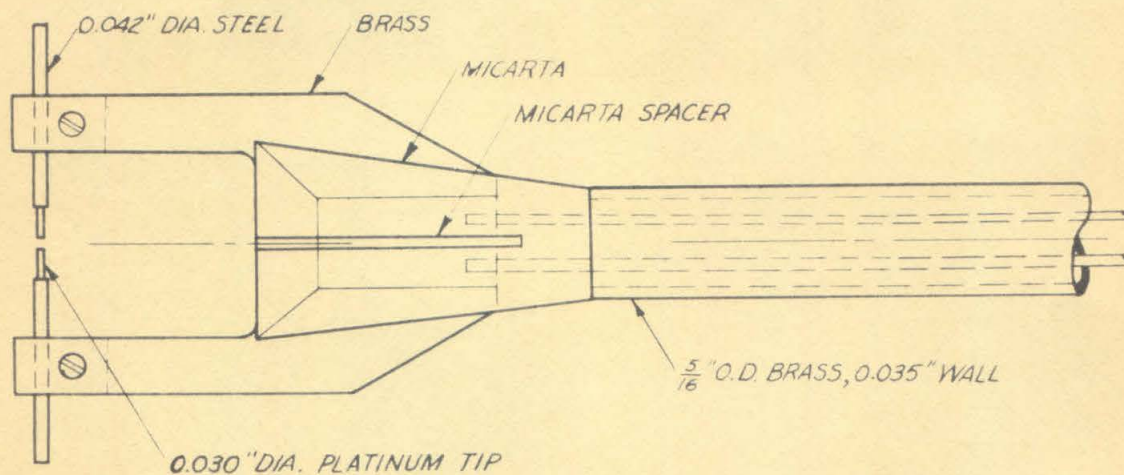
Spherical Ended Electrodes Cold-Forging Jig
